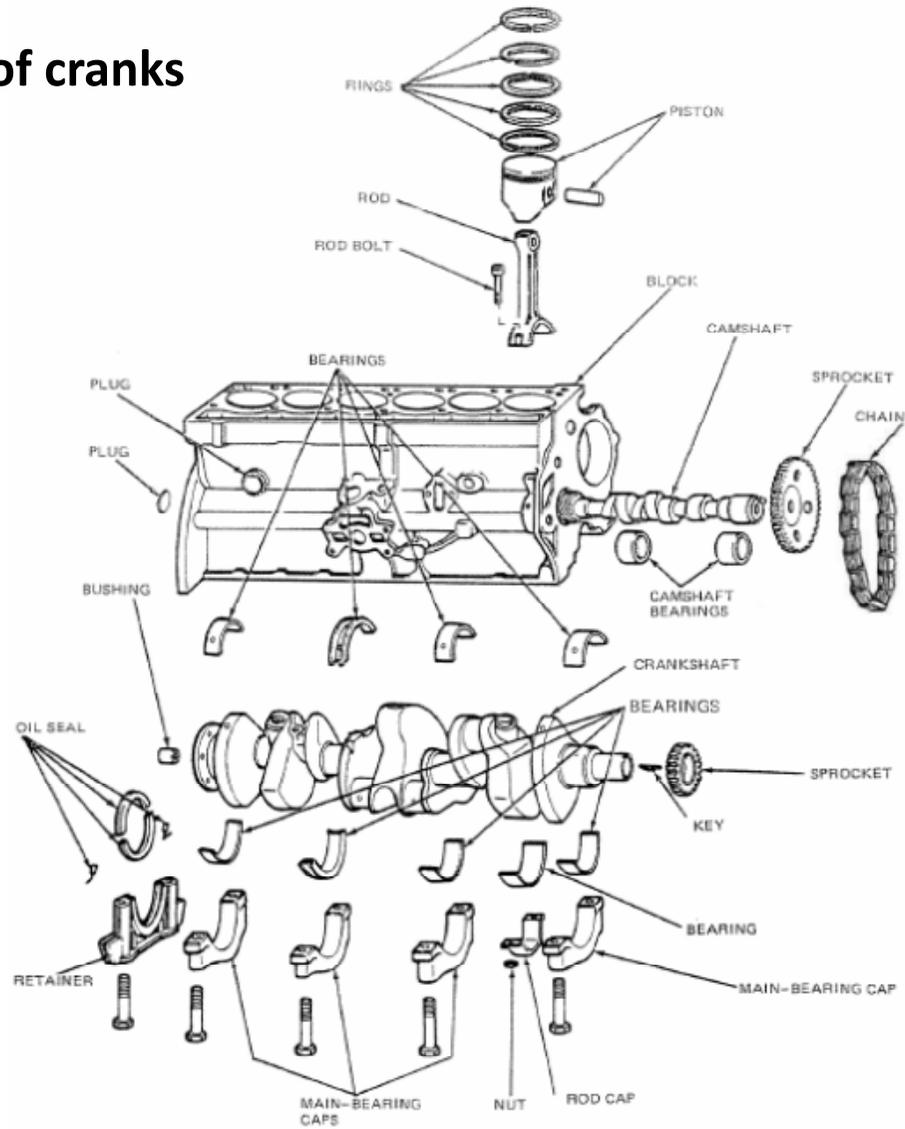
Internal parts from the cylinder block and head of a six-cylinder engine. Only one piston, connecting rod, and set of rings are shown. (Chrysler Corporation)
